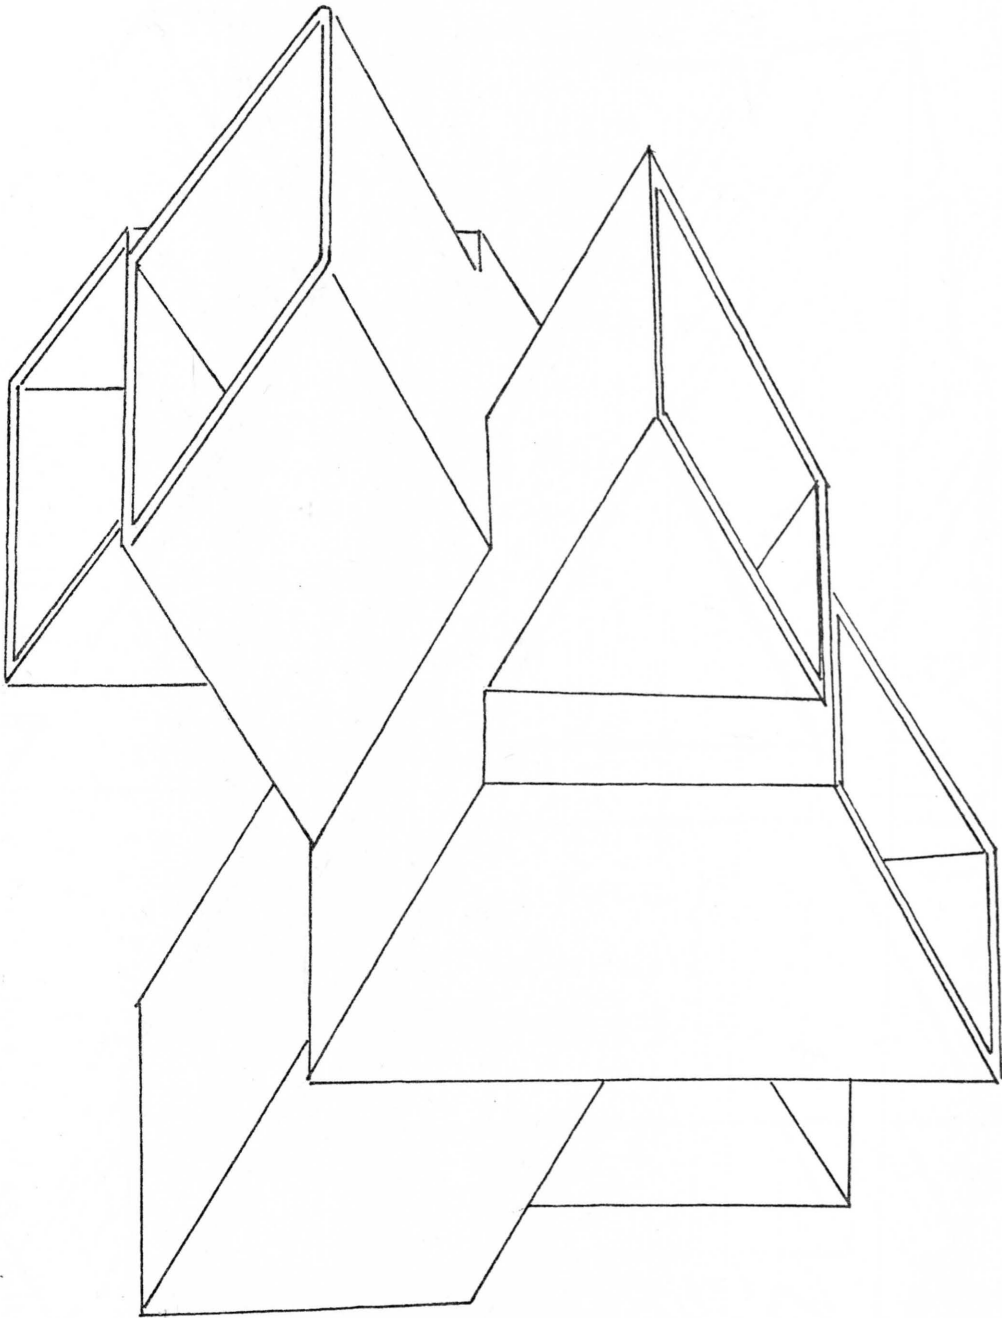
Steel hub. Mild steel was cut and welded to form the hub.
